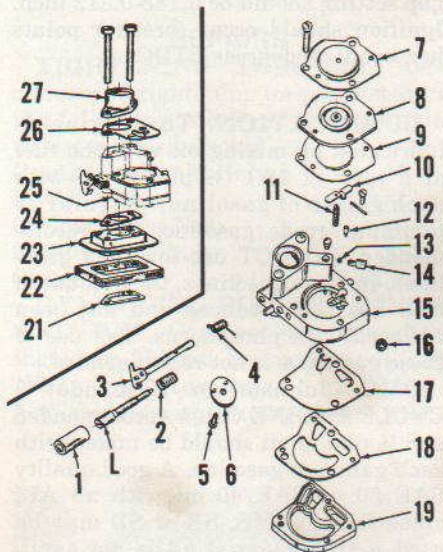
Exploded view of the Pioneer carburetor used on some models.
